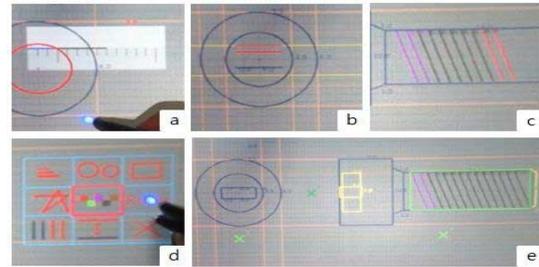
(a) Magnifying Glass Tool. (b) Mirroring Tool. (c) Replication tool. (d) Ruler detection. (e) the front and side view of a bolt
